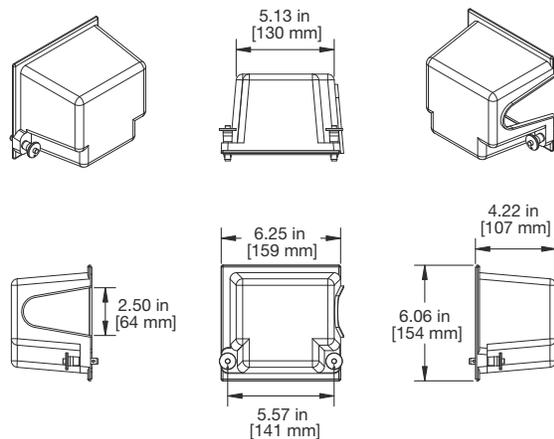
Horizontal Rain Hood Dimensions: Lower Rain Hood Assembly
